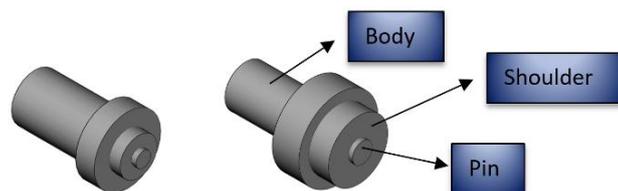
(a) Isometric view of tool 1 (b) Isometric view of tool 2
